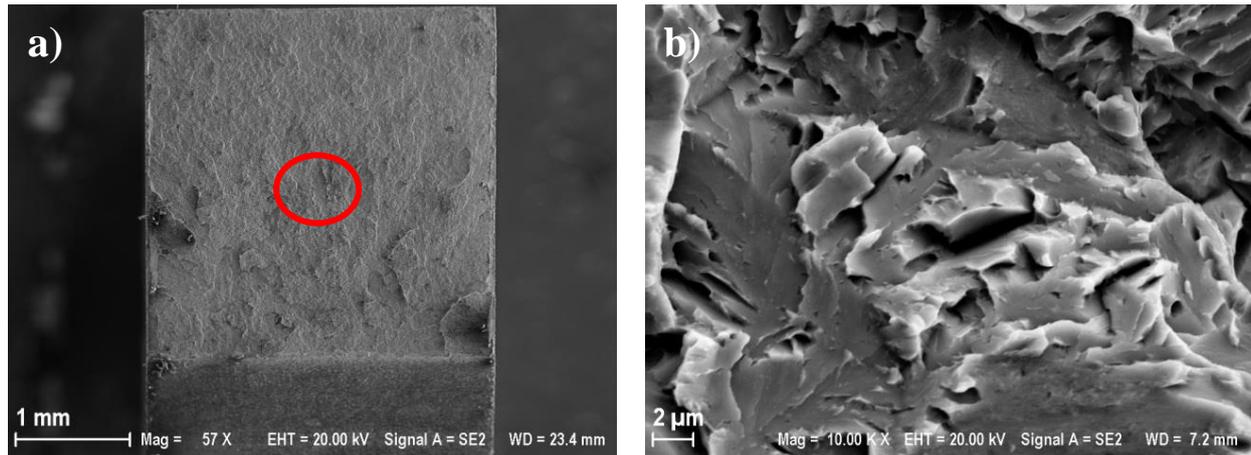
Macro (a) and micro (b) fragile fracture images resulted from miniaturized specimen testing at -194°C for API 5L X65 steel.
